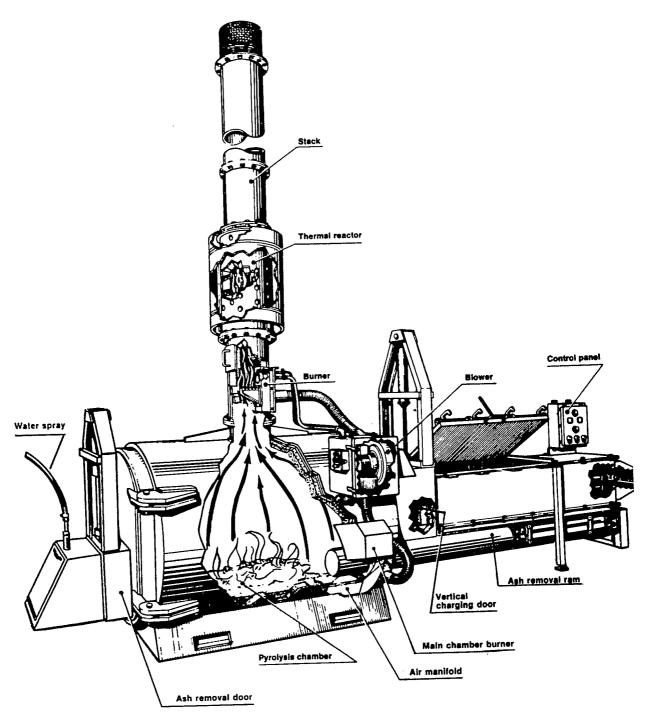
Three-dimensional, cutaway drawing of incinerator module in Marysville facility.
